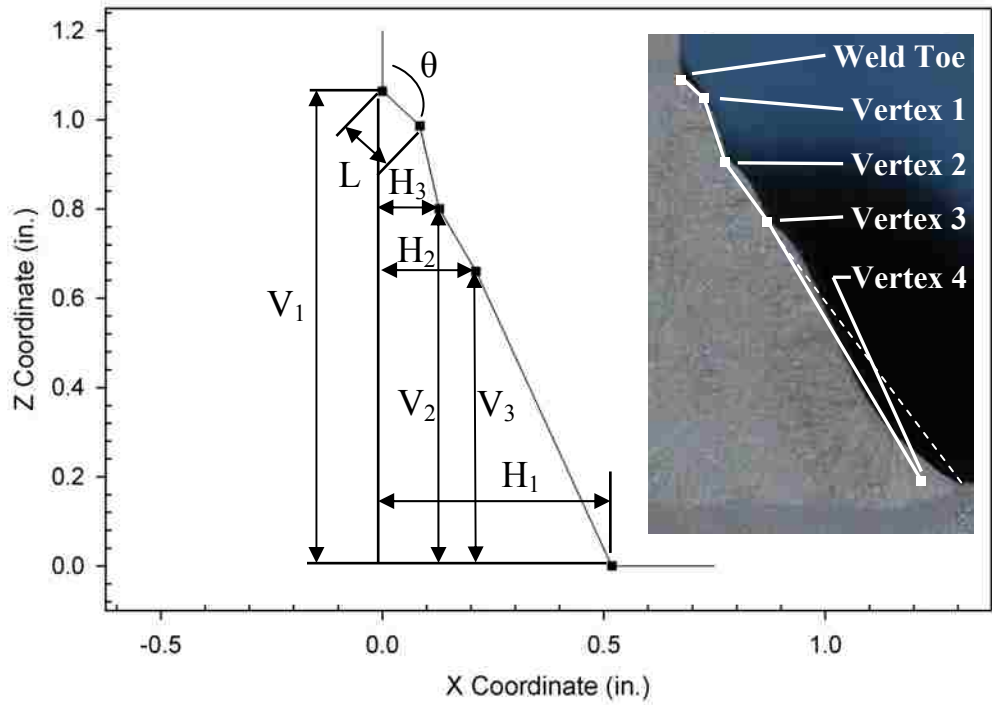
Weld dimension parameters. Inset shows weld idealization over typical weld profile.
